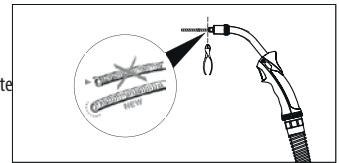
Cutting off the Liner Stick Out and Reassembling the Torch
